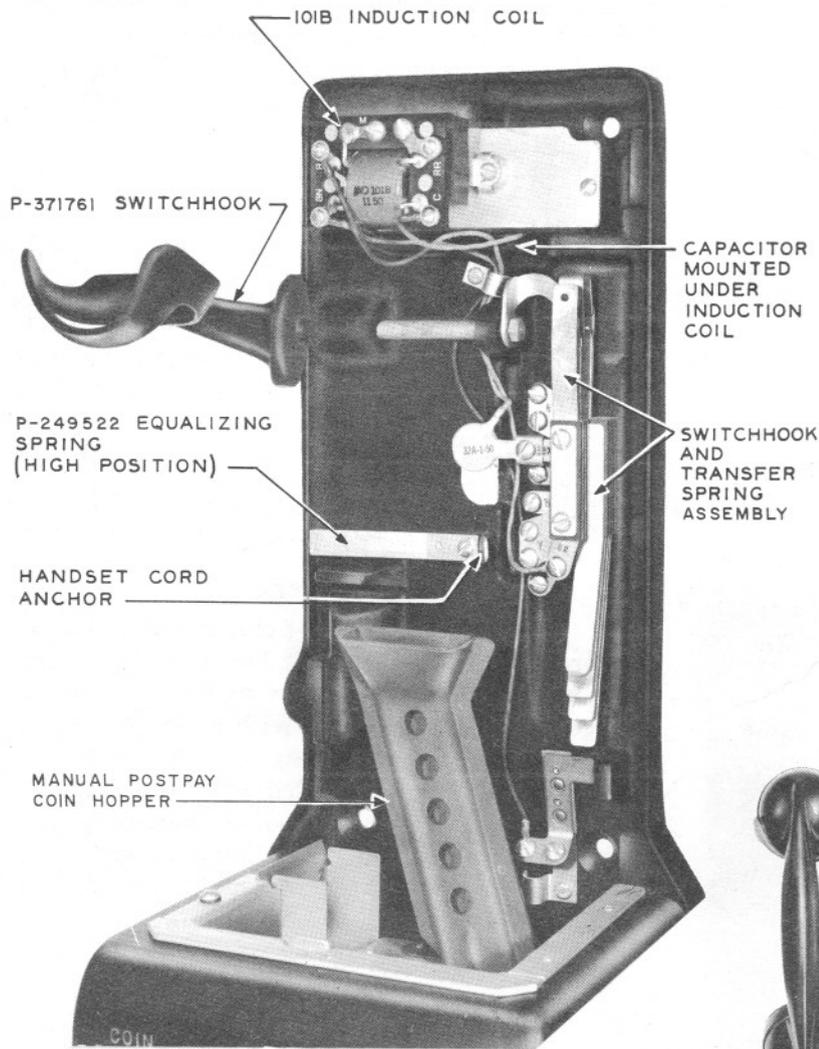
Switchhook and Transfer Spring Assembly with Internal Induction Coil and Capacitor
